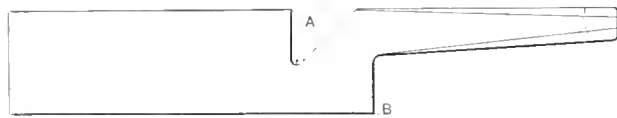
Tool Blank with Form of Fillets to be Provided.
